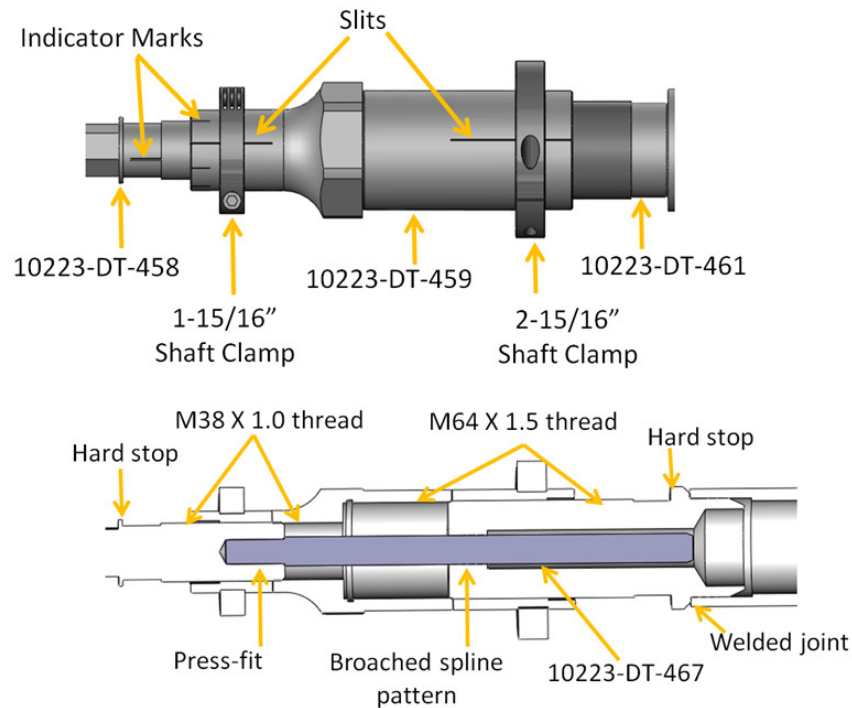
A side-view (Top) and section-view (Bottom) of the adjustment mechanism are shown. Key design features are identified in the photos [24].
